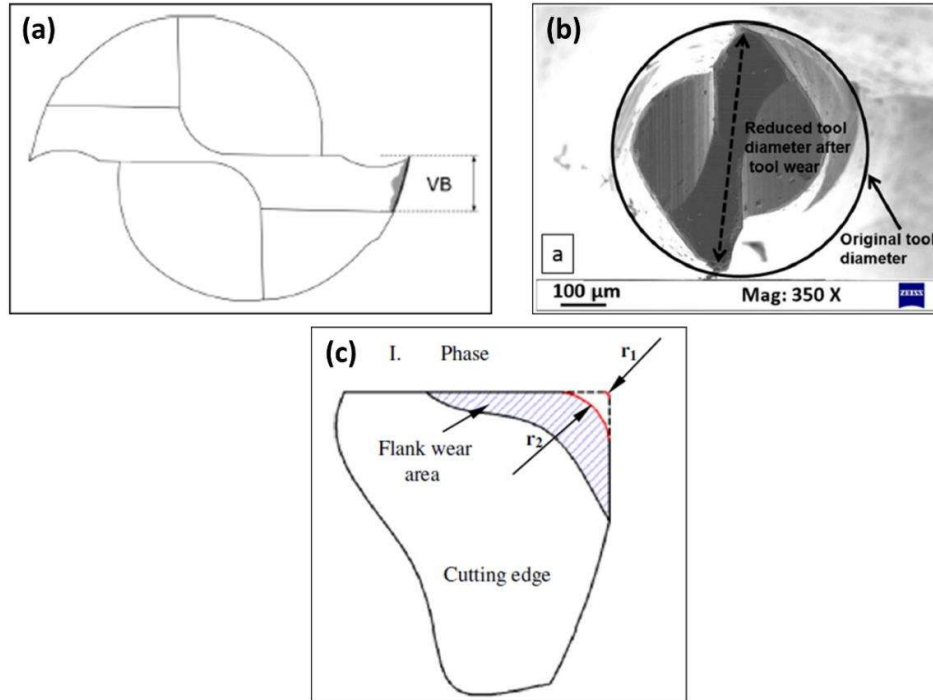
Measurement of (a) flank wear [49], (b) tool diameter reduction [31], and (c) change in edge radius [50]
